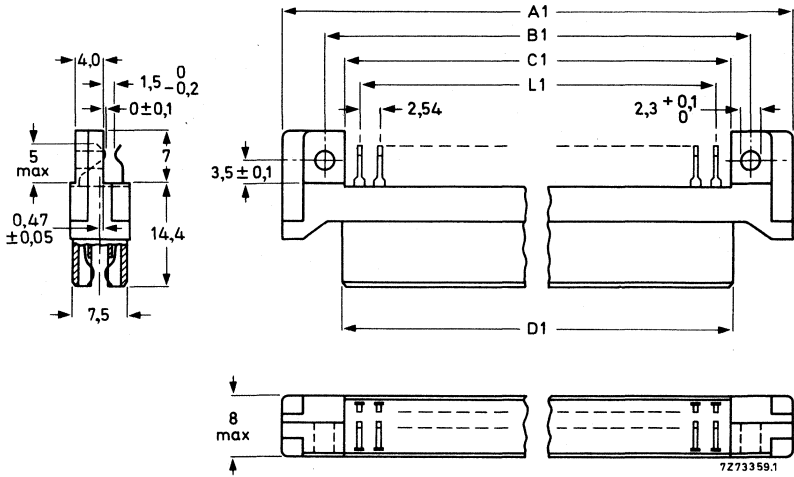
Female part with solder tags; see Table 2 for dimensions A1, B1, C1, D1 and L1.
